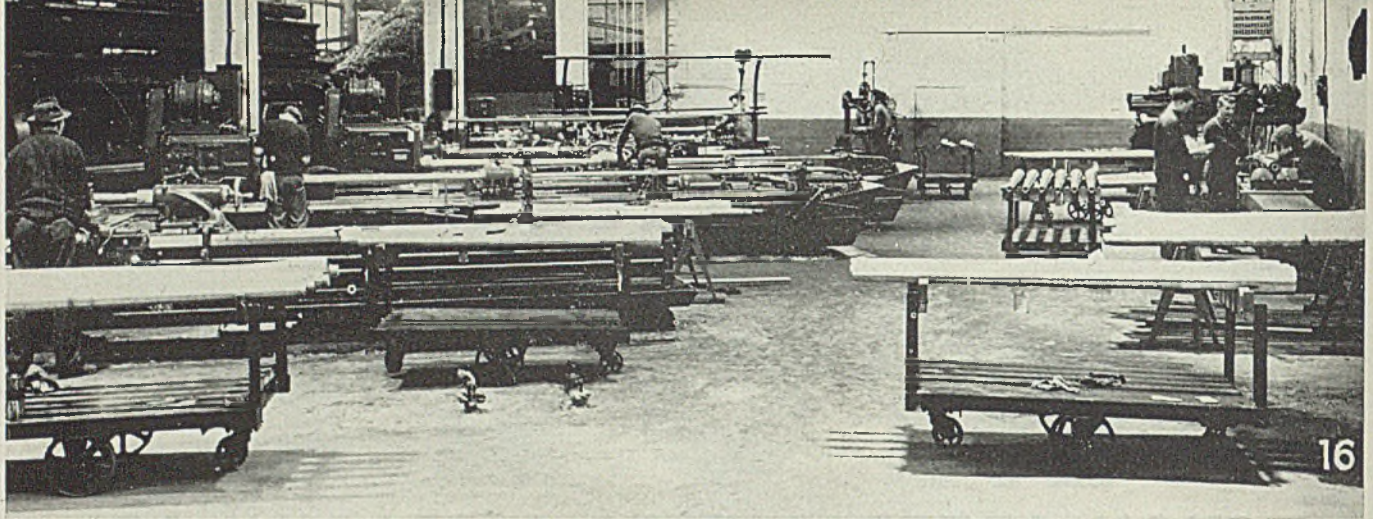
One end of the machine shop where 37-millimeter gun forgings are being finished
